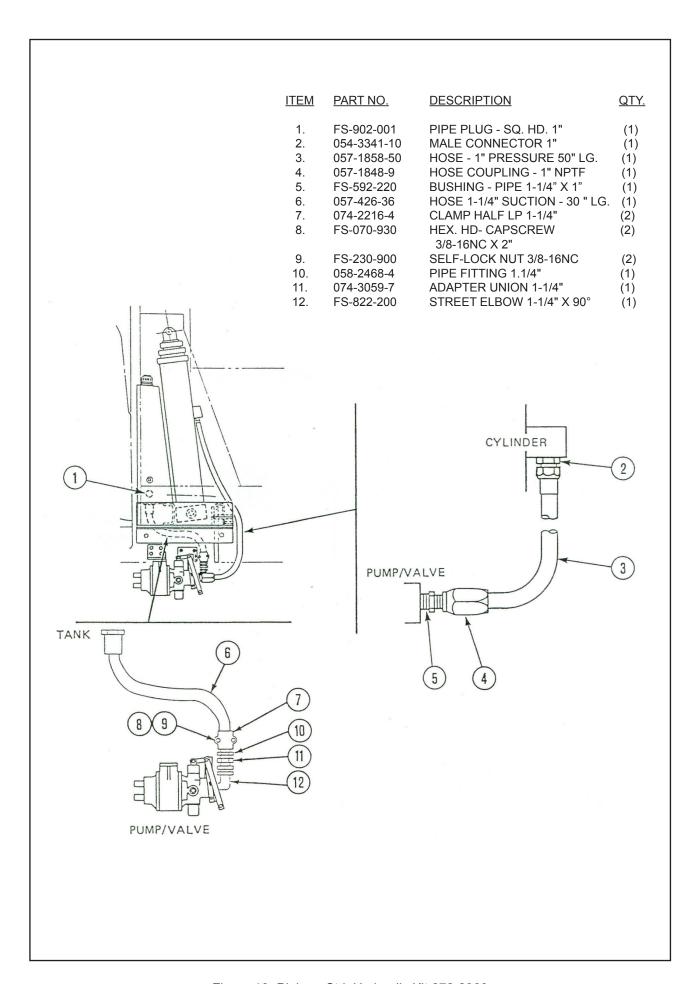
Piping - Std. Hydraulic Kit 272-2360
